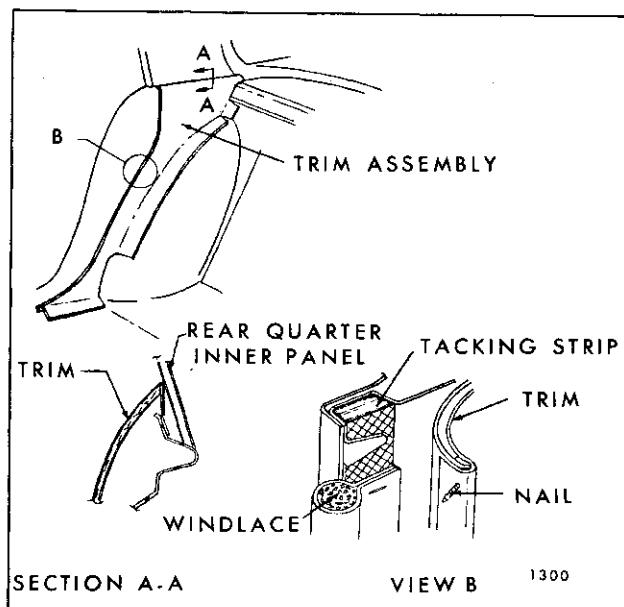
Rear Quarter Lower Trim Assembly - "B-C 39-49-69" Styles
